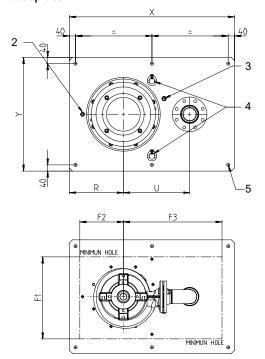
Pump dimensions and immersion depths, rectangular baseplate
